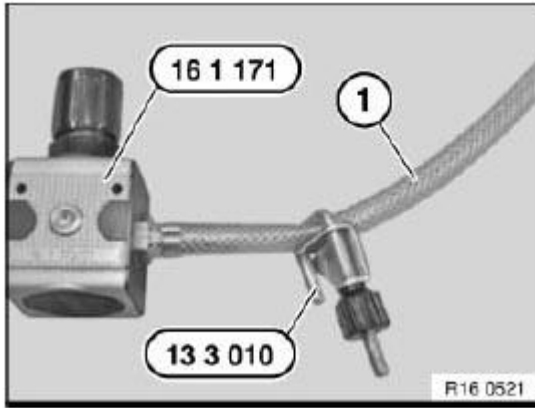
Identifying Supply Line With Special Tool 13 3 010 And 16 1 171
